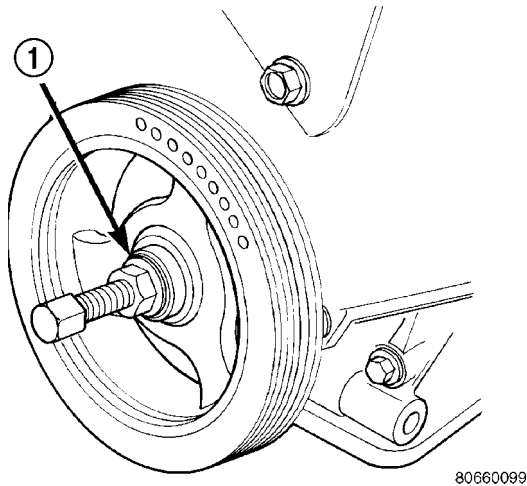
Crankshaft Vibration Damper - Installation - Typical
